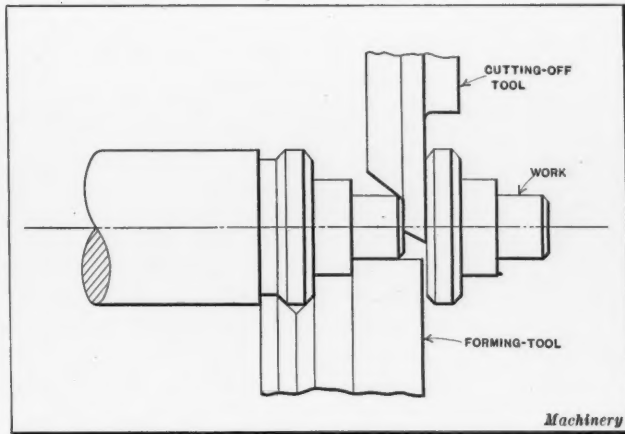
Example illustrating Application of Forming and Cutting-off Tool
